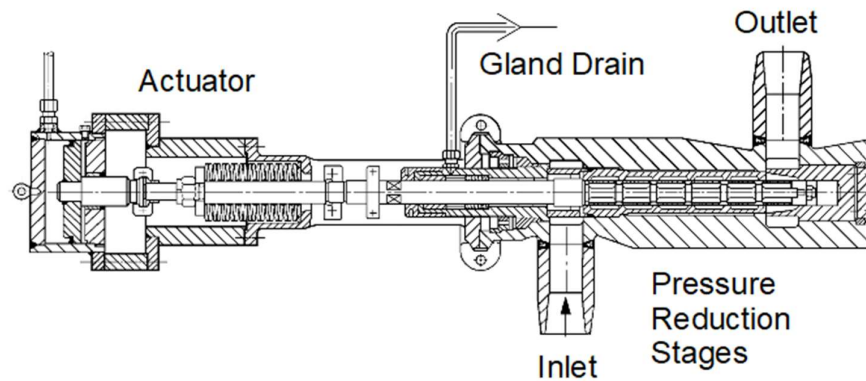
Binary type - Integrated valve type section drawing (Desensitised from undisclosed source)
